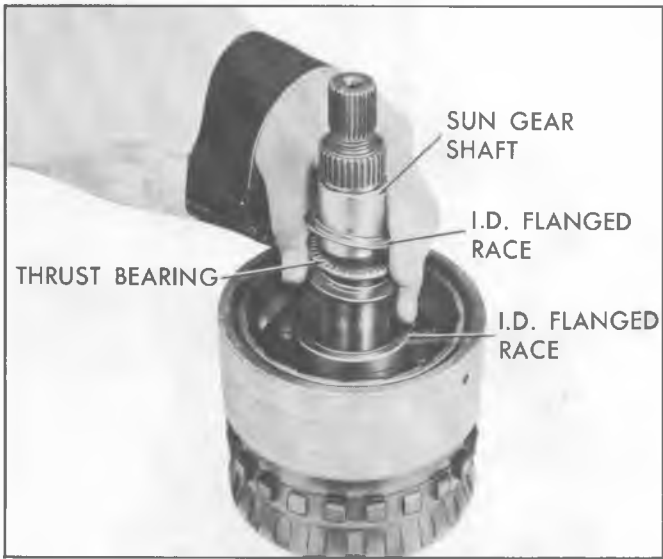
T—Installing Center Support to Sun Gear Thrust Bearing and Races
